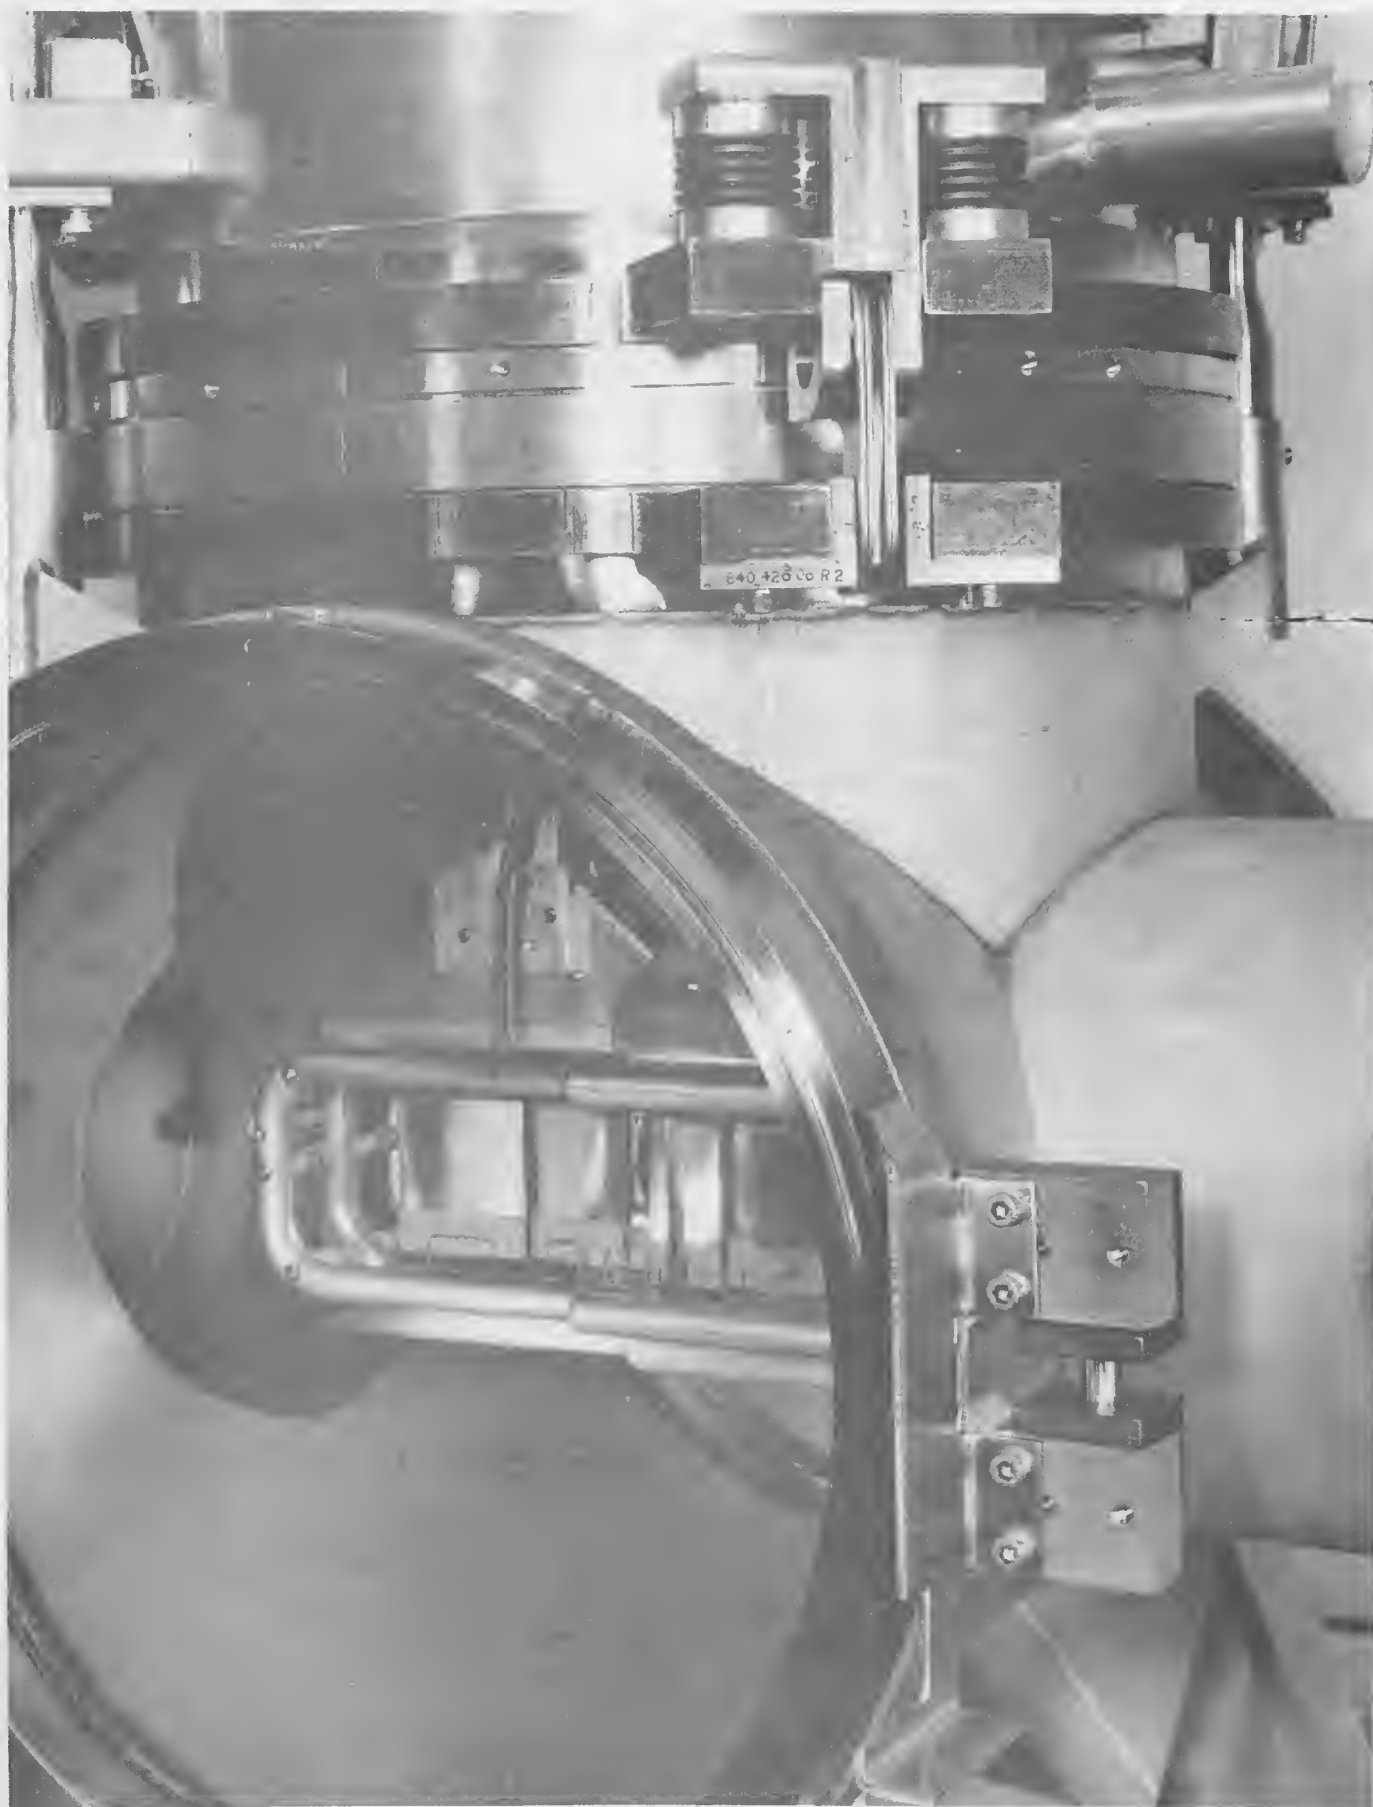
Coupling with Belleville Load Springs. Lower Part of Photograph Shows a Male Flange with a Standard Sheet Metal Guide.
